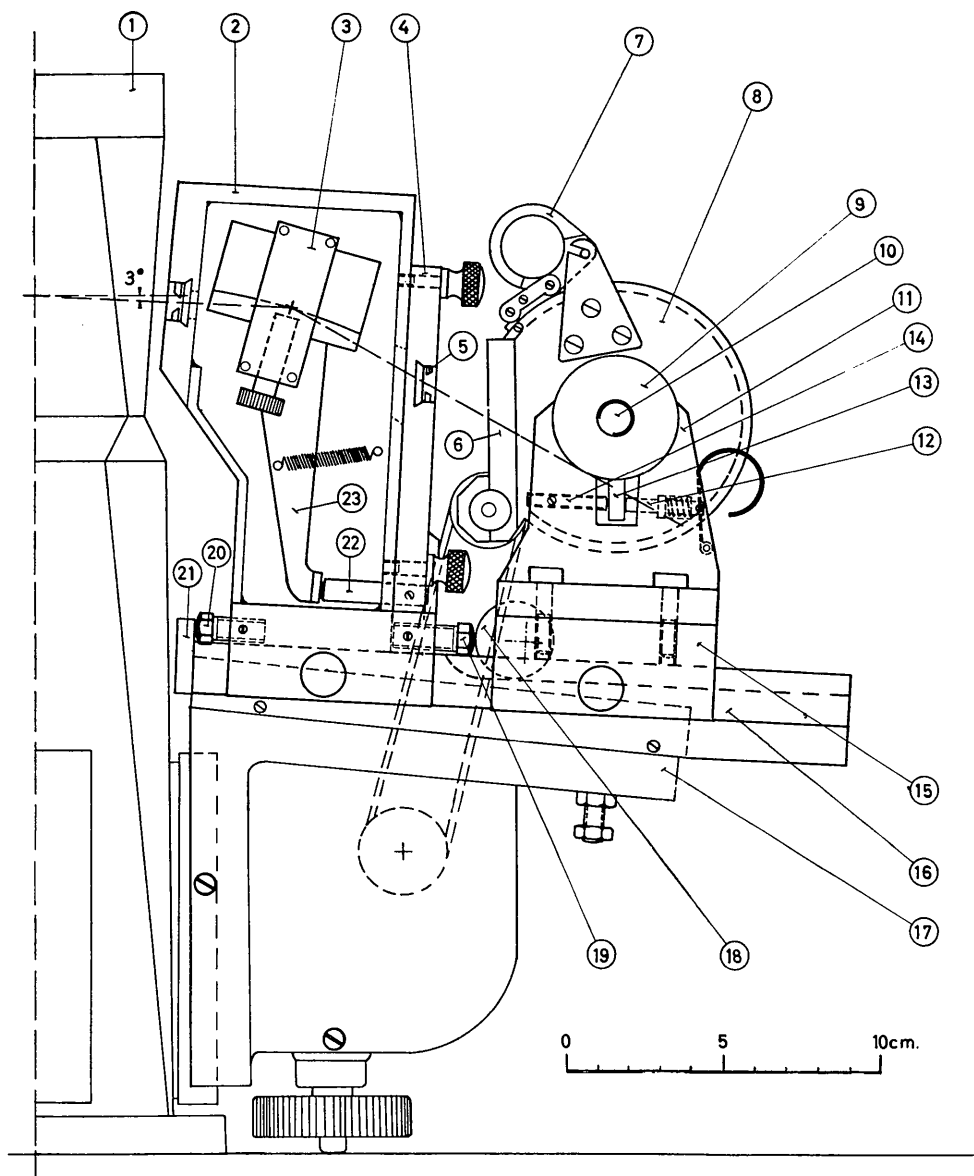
Side view of Guinier camera: 1 X-ray tube. 2 monochromator housing, with cover removed. 3 quartz monochromator and holder. 4 exchangeable exit plate. 5 exit slit. 6 rotating-sample holder. 7 film-loading clamp (tightens lead rubber strip that keeps film in place). 8 cassette. 9 nut. 10 cassette mounting pin. 11 pillar. 12, 13, 14 cassette tilt adjustment. 15 cassette base. 16 dove-tail base. 17 Philips Norelco camera support. 18, 19 cam and adjustable stop for cassette. 20, 21 end stop. 22, 23 monochromator tilt adjustment.
